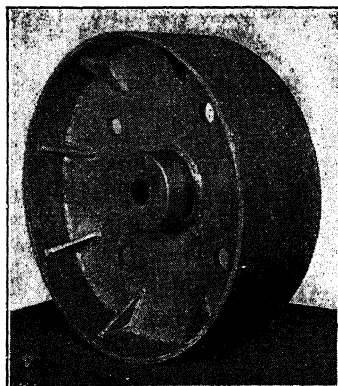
Heavy duty pulley of arc-welded steel construction.
